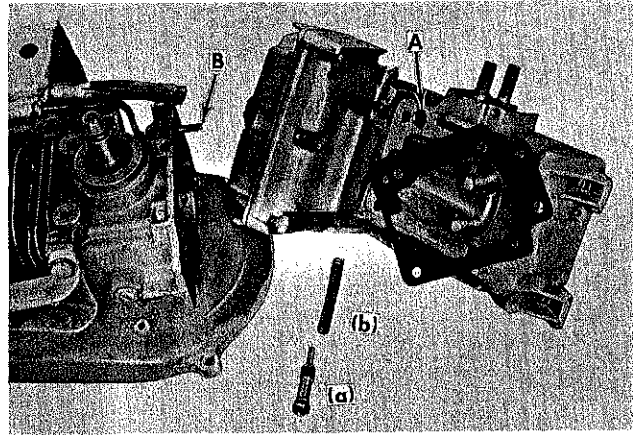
The oiler cup, oiler piston, and "O" ring (a) and oiler spring (b) removed from the opening at "A" for service. The oiler piston is actuated by the oiler control rod "B"
